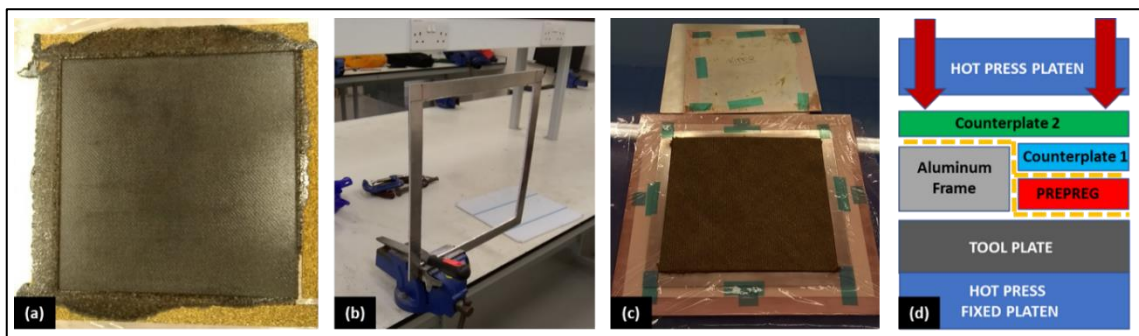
(a) Hot press resin leak with cork frame, (b) custom made aluminium frame, (c) Layout with aluminium frame, (d) Hot press outline.
